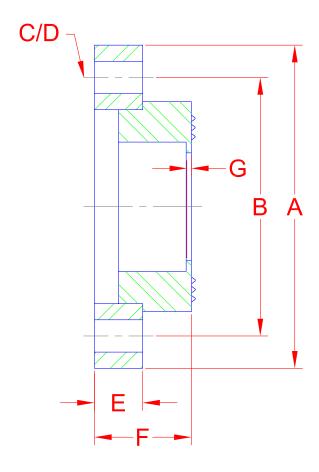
S Flange, Filament Wound 150 lb. Spacer
